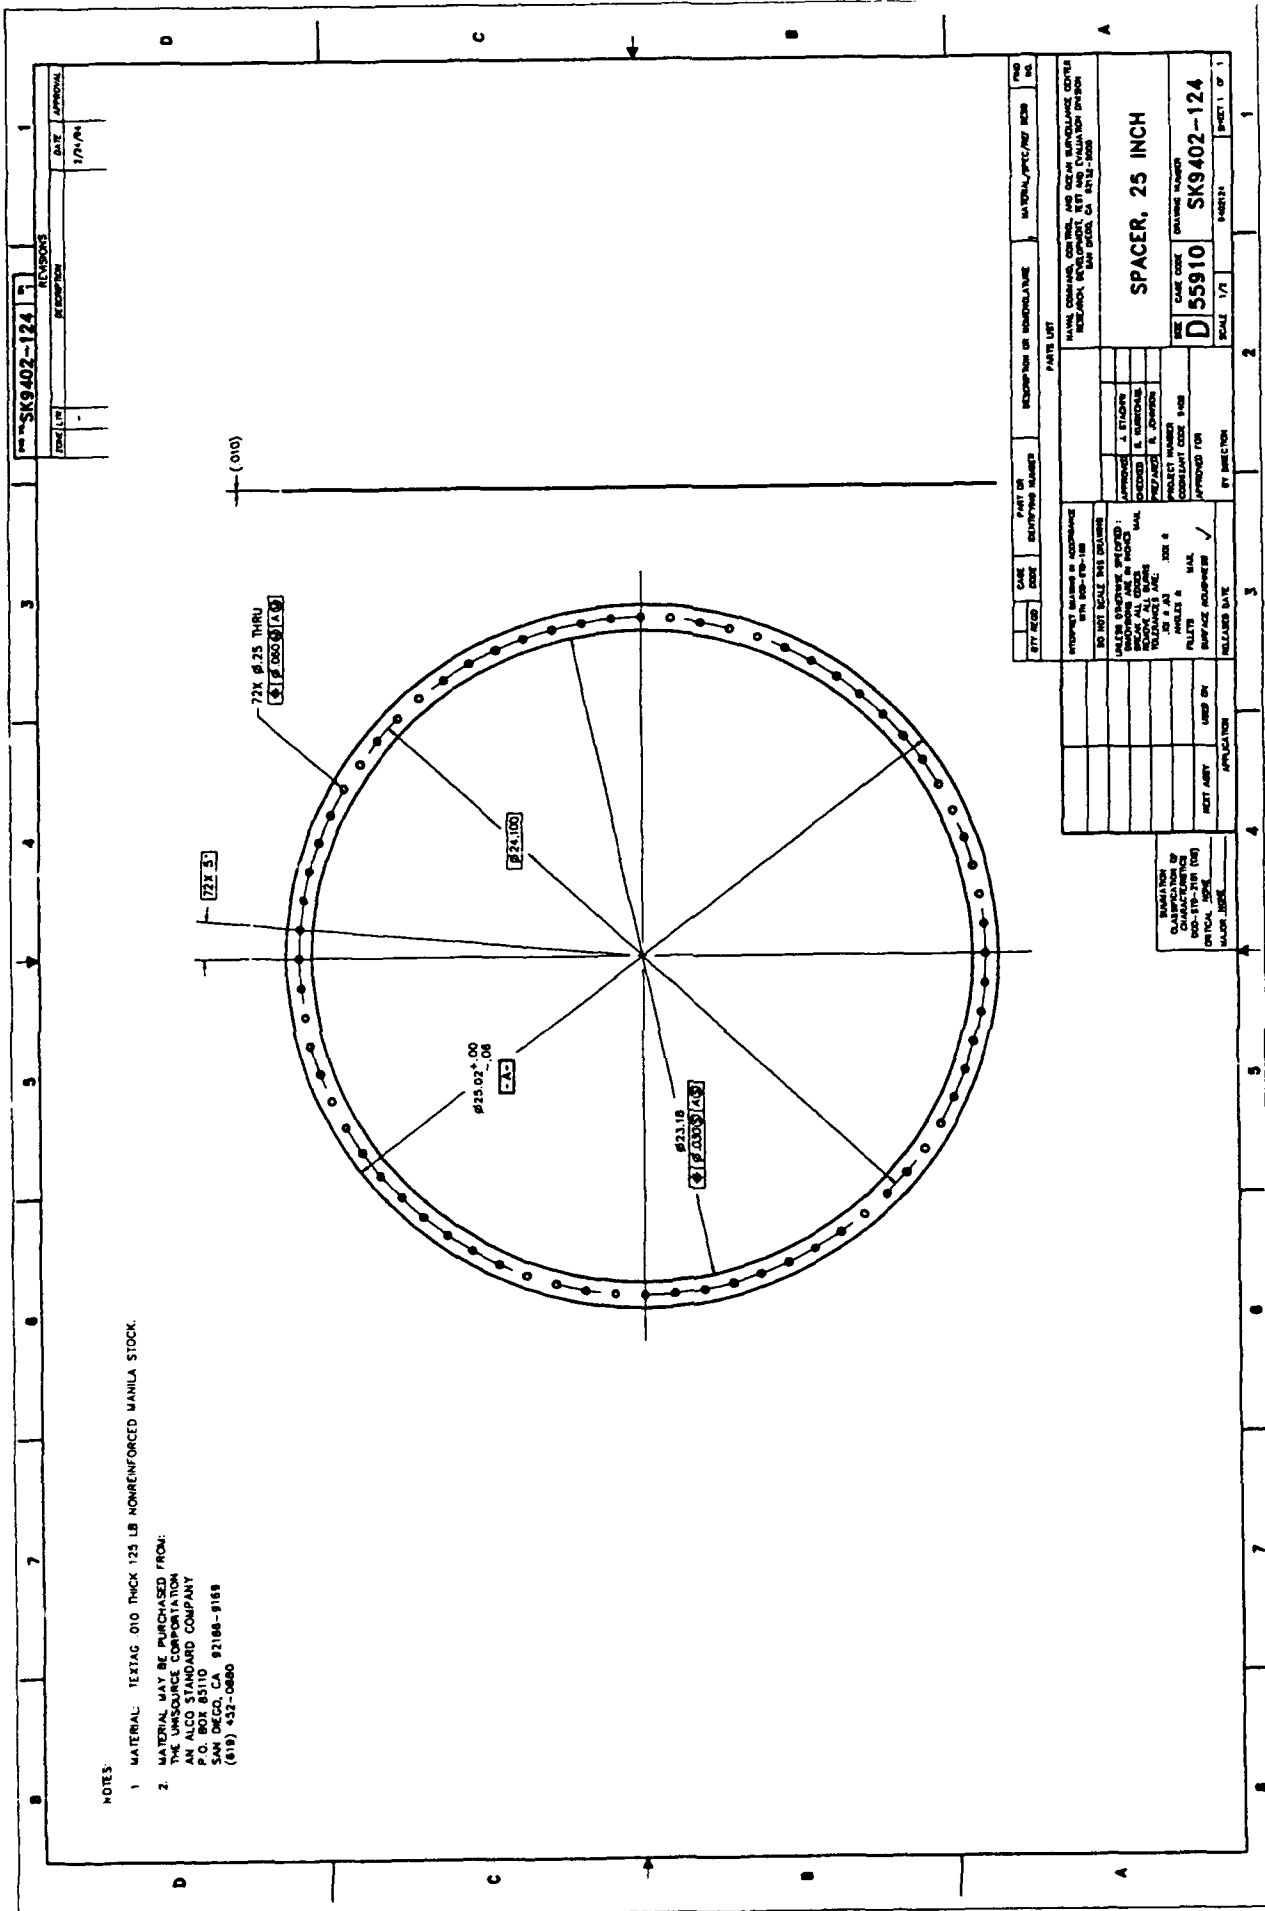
Engineering drawing of the axial bearing-surface spacer for the forward and aft heads.
